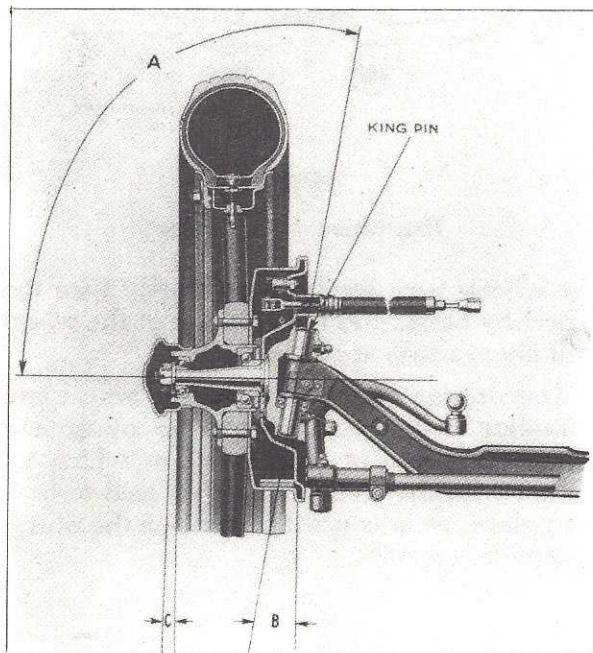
Cross section showing front wheel spindle and king pin inclination
